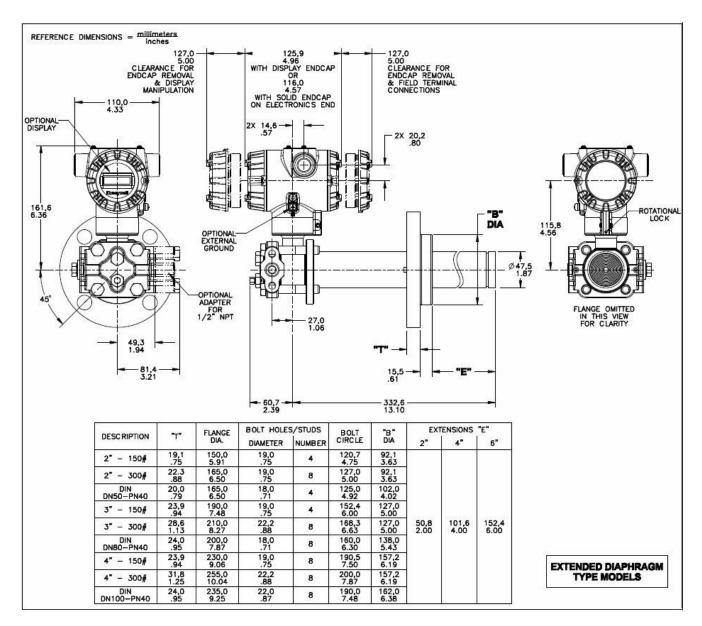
Typical mounting dimensions for extended diaphragm type models STF724 and STF732.
